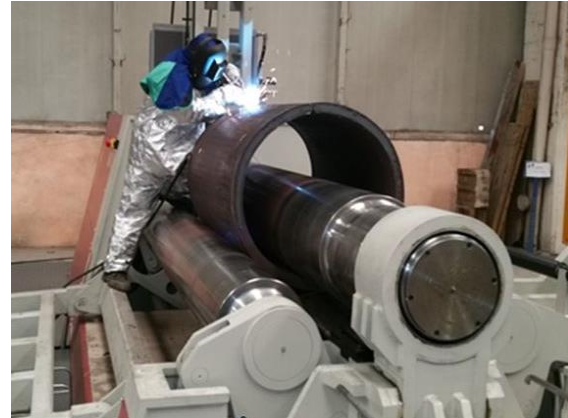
Closing of the shell at a radius of $R370$ and spot welding on rolling machine AKYAPAK Type AHS 25/35
